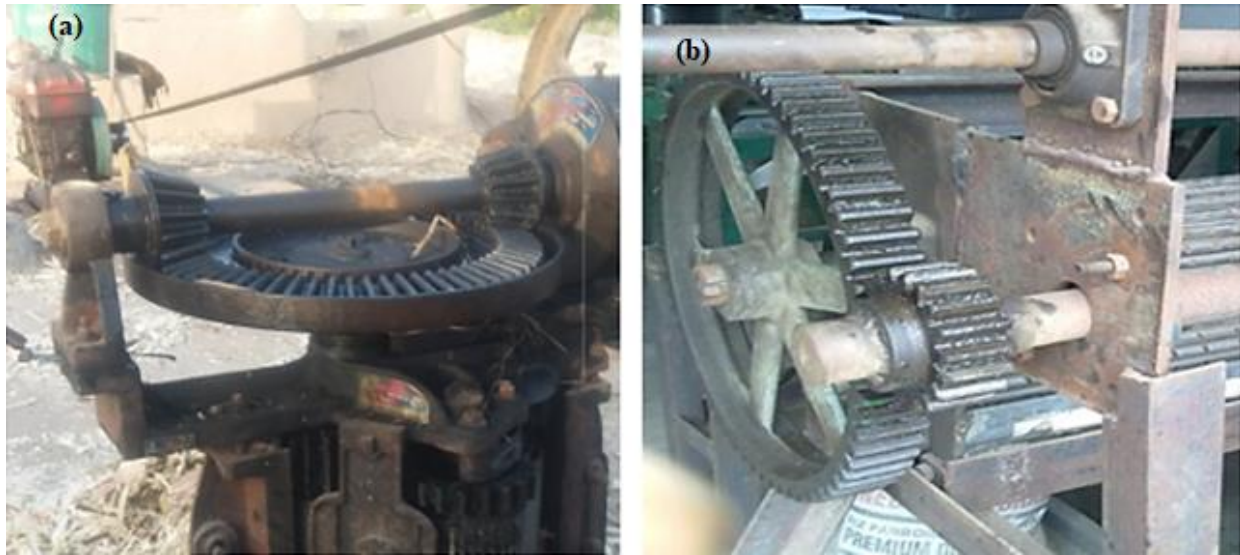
Driven Assembly of (a) Conventional Sugar cane Crusher (b) Modified Sugar cane Crusher
